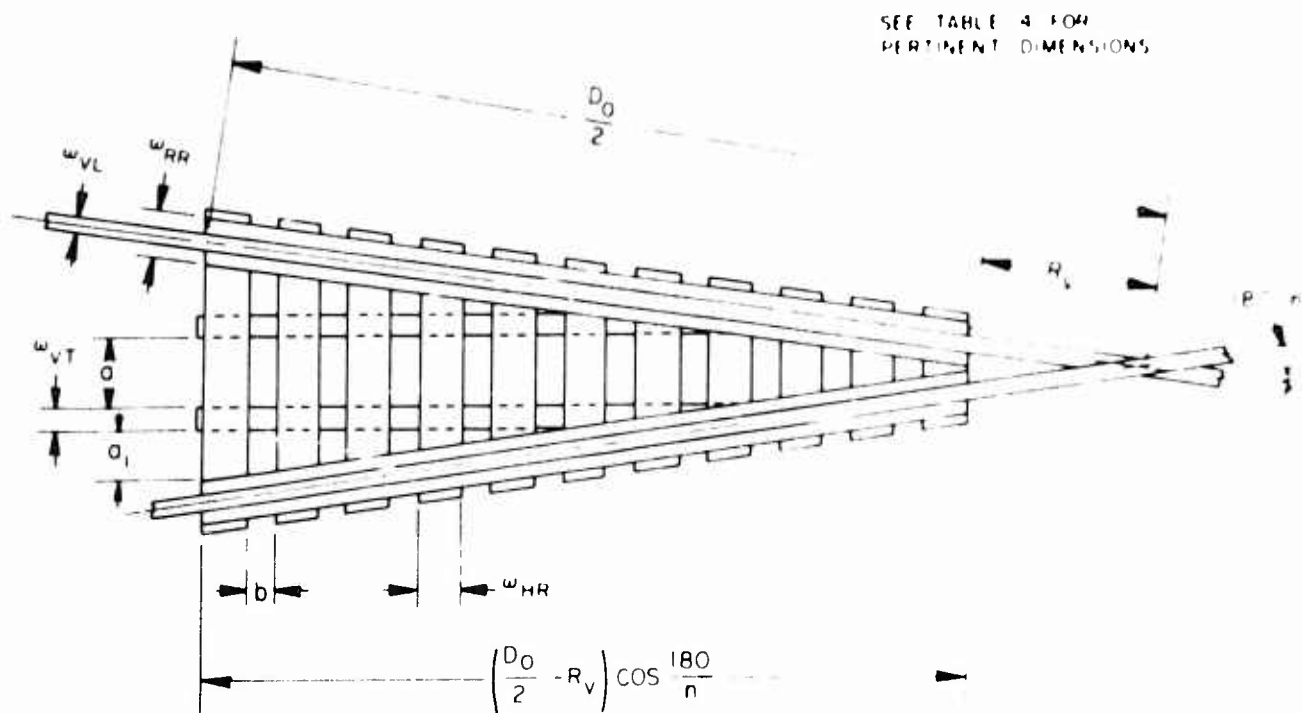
Typical Gore Layout - FIST Ribbon Parachute
